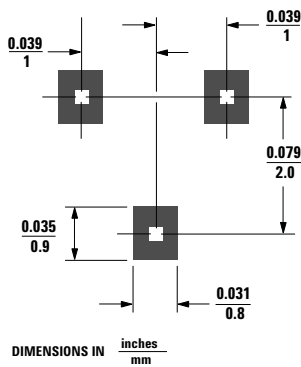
Recommended PCB Pad Layout for Avago Technologies' SOT-23 Products.
